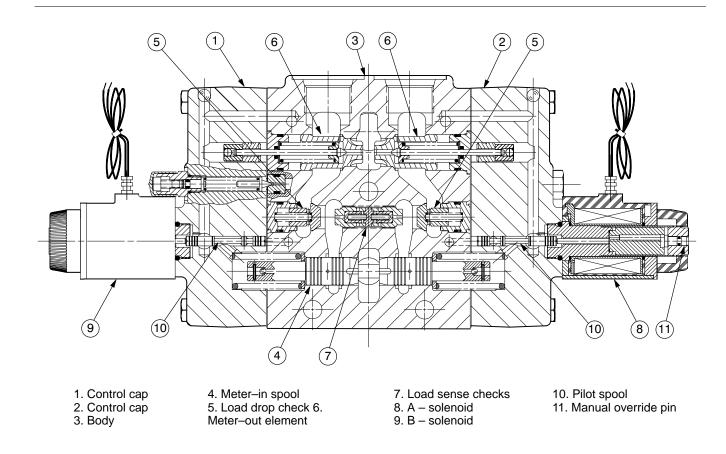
Sectional view showing a basic electrohydraulic valve section. 8.
